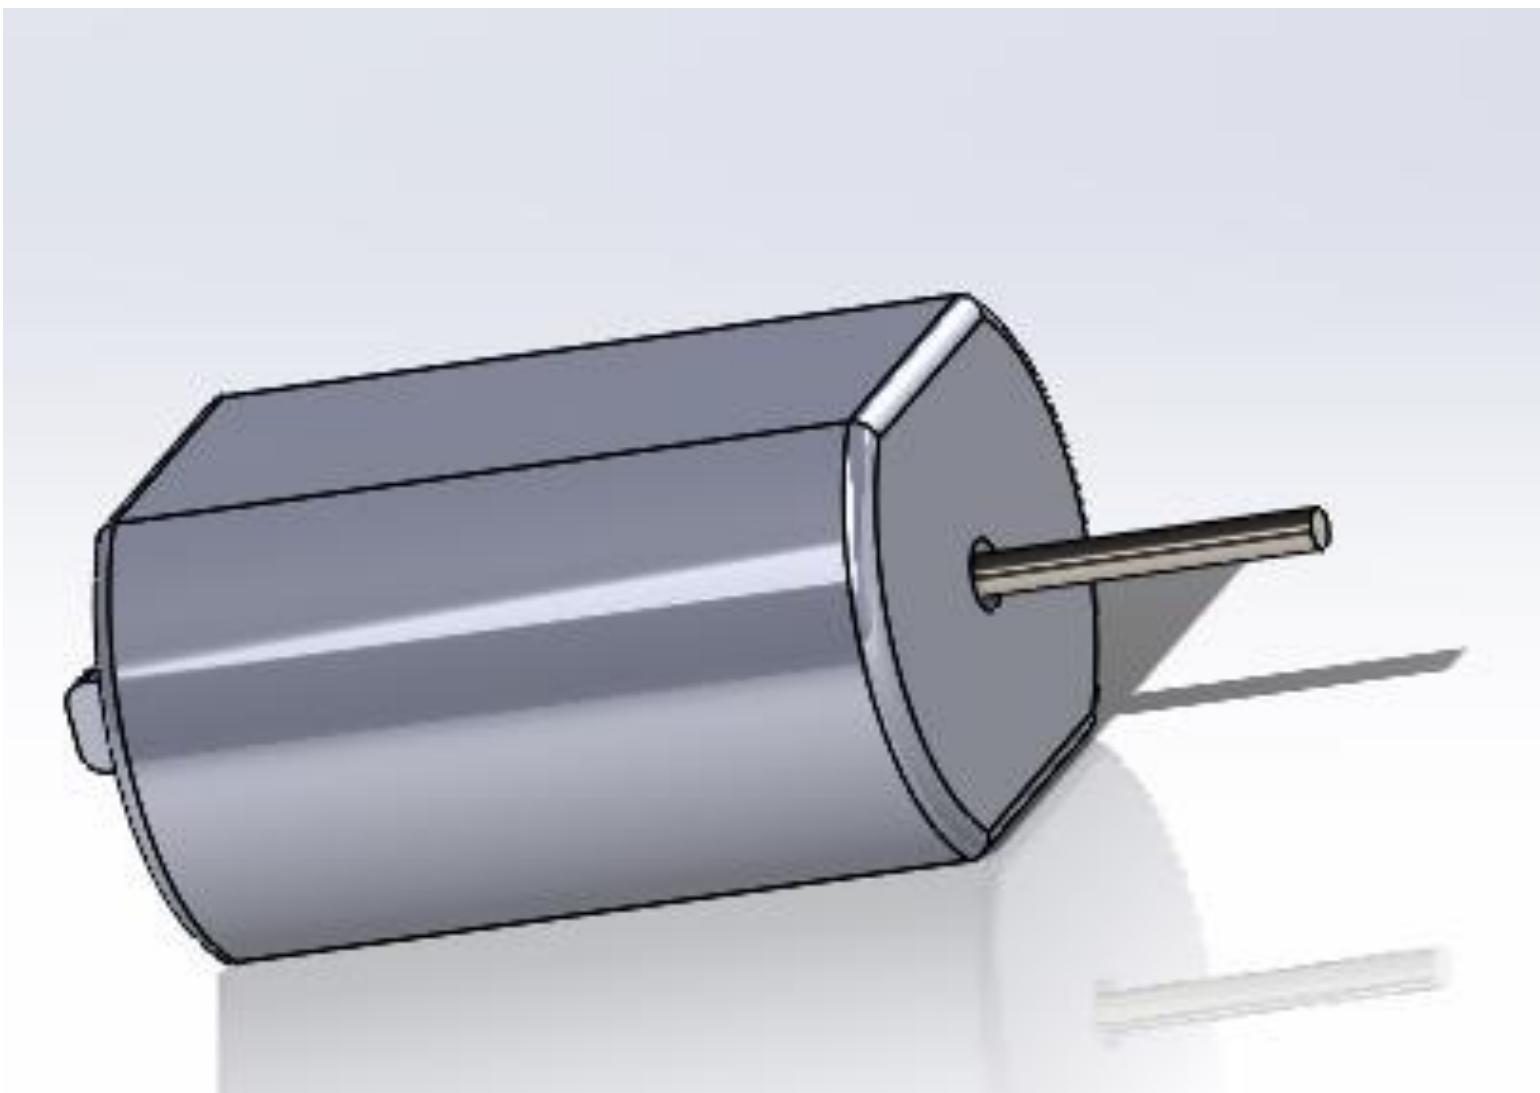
Part 1016 (Standard Motor 12850 rpm 12VDC) CAD Drawing
